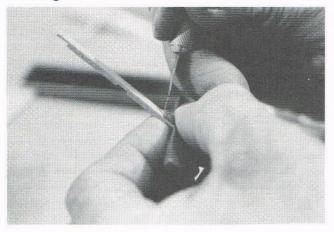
Transfer the measurement to both workpieces, laying the end of the board against the fence and marking the joint line across the board with a knife tip.
